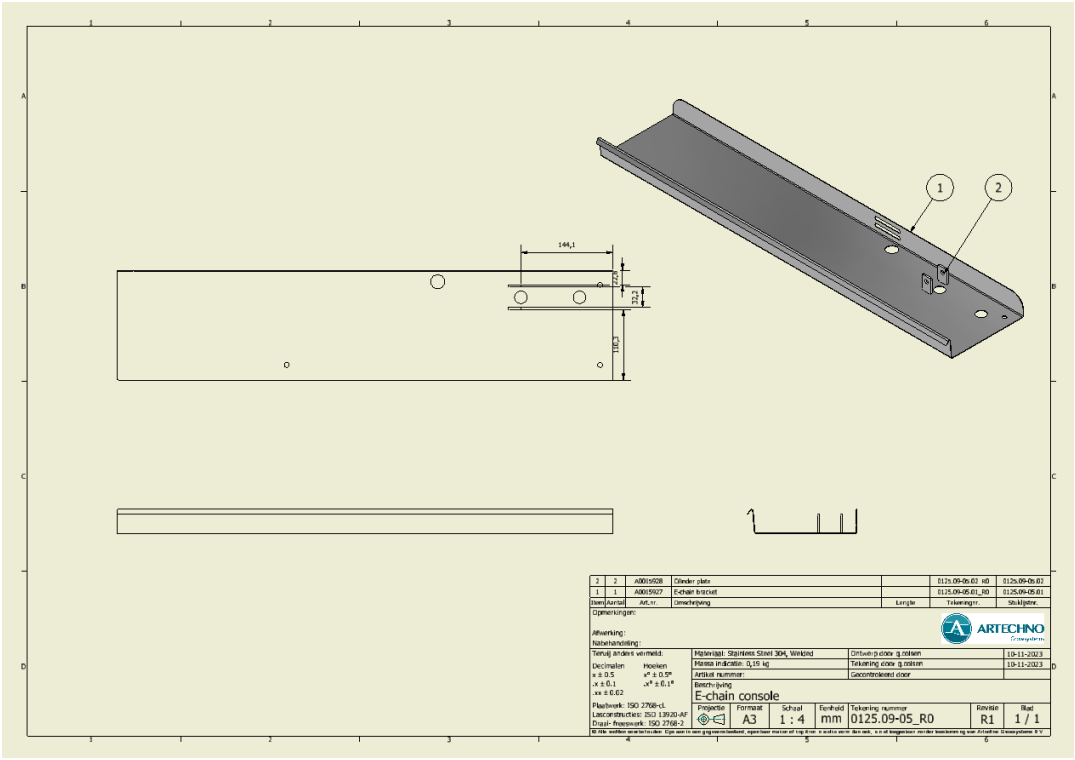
Welding drawing of the cable caterpillar guidance.
